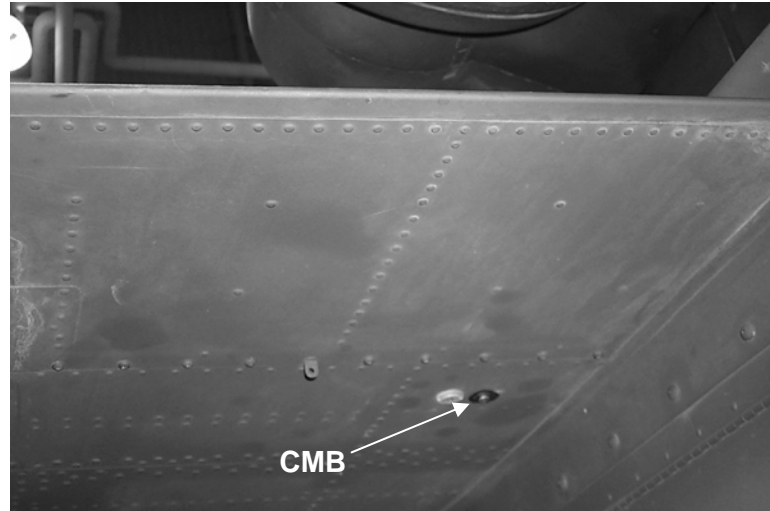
Wing Assembly (AH-64A/D) with CMB Installed
